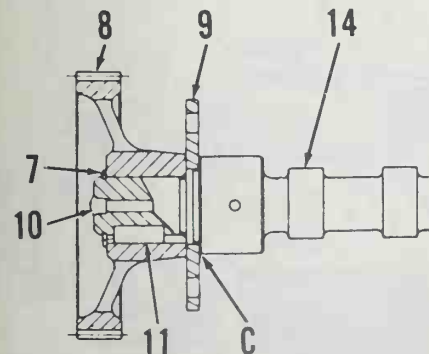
Install gear (8) on camshaft (14) so there is 0.07-0.22 mm clearance (C) between retainer (9) and side of front camshaft journal.
